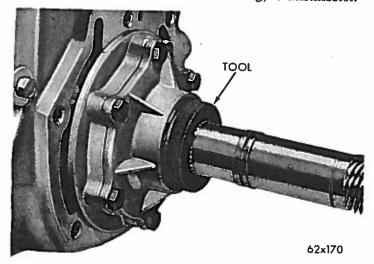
Aligning Rear Oil Pump Cover (Tool C-3864)
